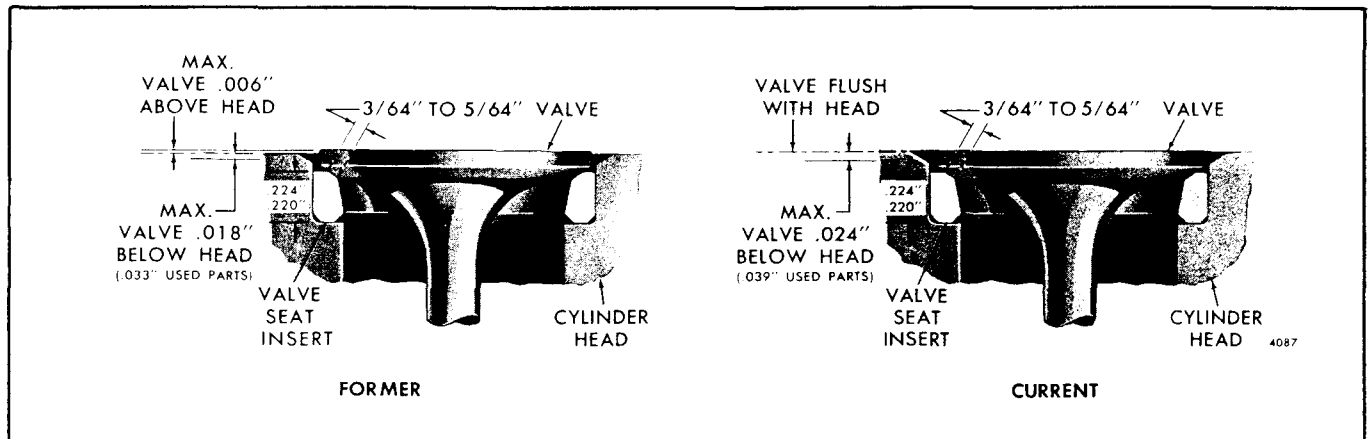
Relationship Between Exhaust Valve, Insert and Cylinder Head (Four Valve Head)
